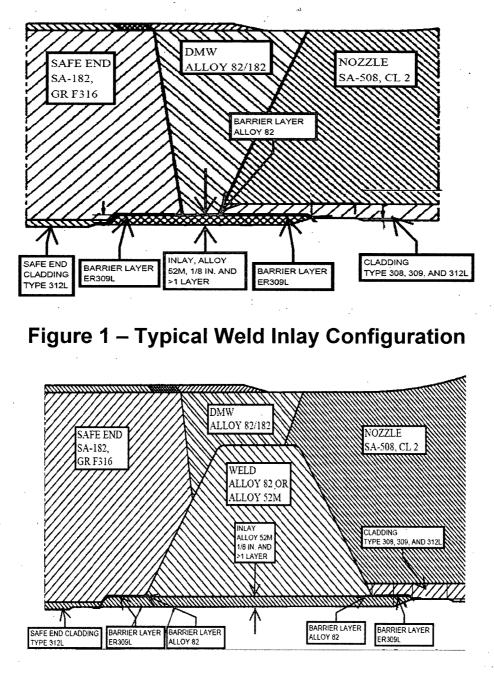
Typical Weld Inlay Repair Configuration
